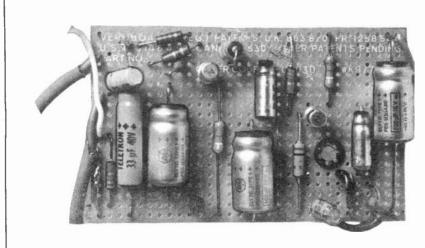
Shows the layout of the components on the topside of the stripboard. In the prototype no breaks in the copper strips were found necessary around the single fixing-hole. Also shows full interwiring between board and case mounted components.
